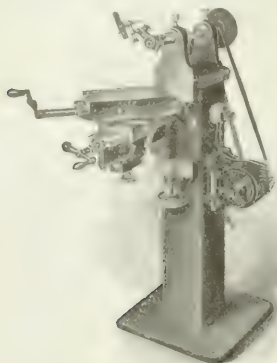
Universal Cutter and Surface-Grinding Machine.
